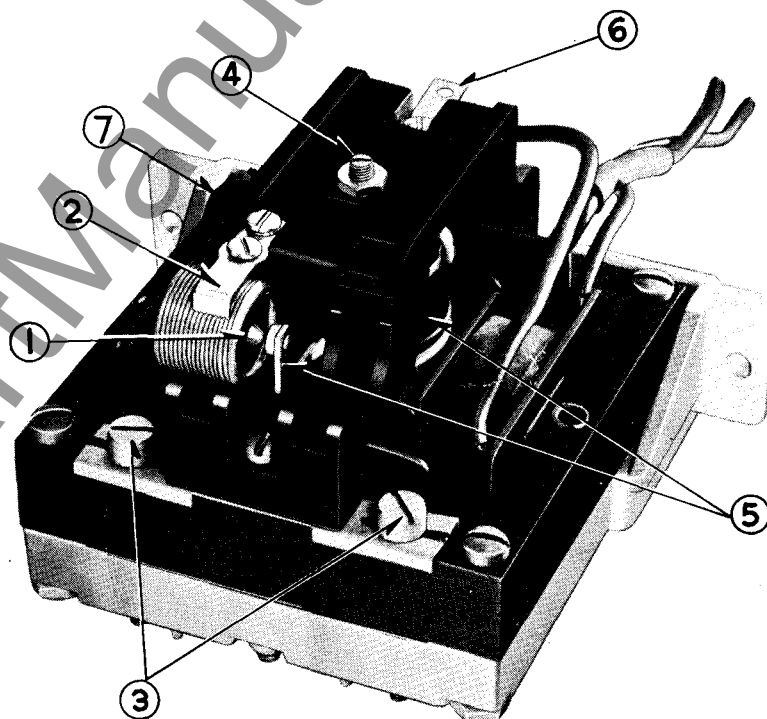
Directional Unit. 1-Stationary Contact. 2-Stationary Contact pressure spring. 3-Magnetic adjusting plugs. 4-Upper bearing screw. 5-Moving element assembly. 6-Spring adjuster clamp. 7-Current Bias Vane.
